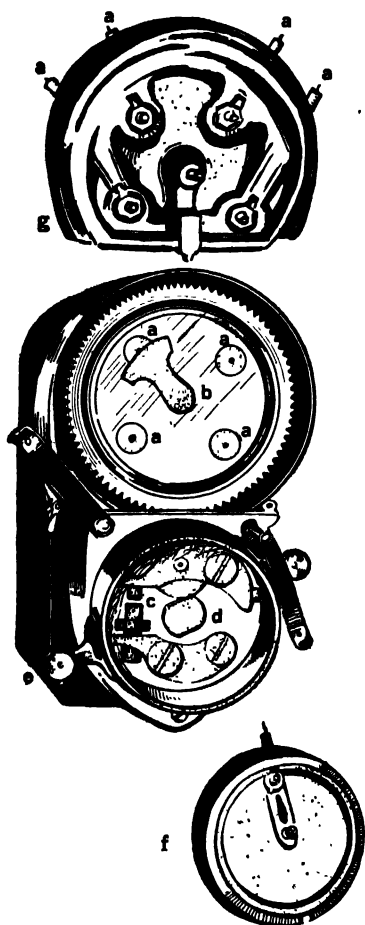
Front view of magneto (distributor head and breaker-box cover removed).
